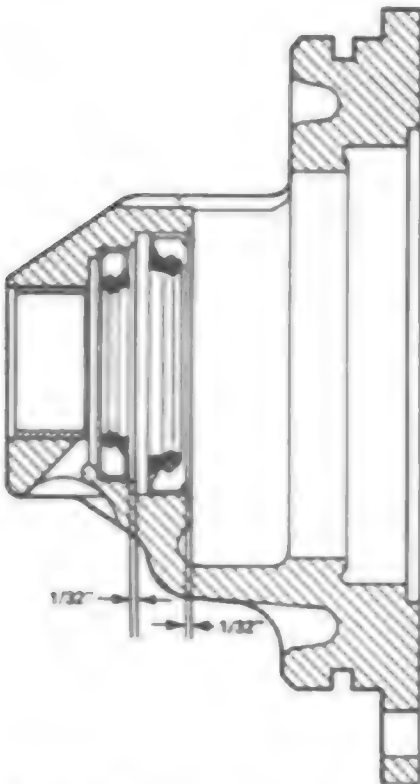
On models not equipped with torque amplifier, install oil seals in pto and clutch shaft bearing cage as shown.
